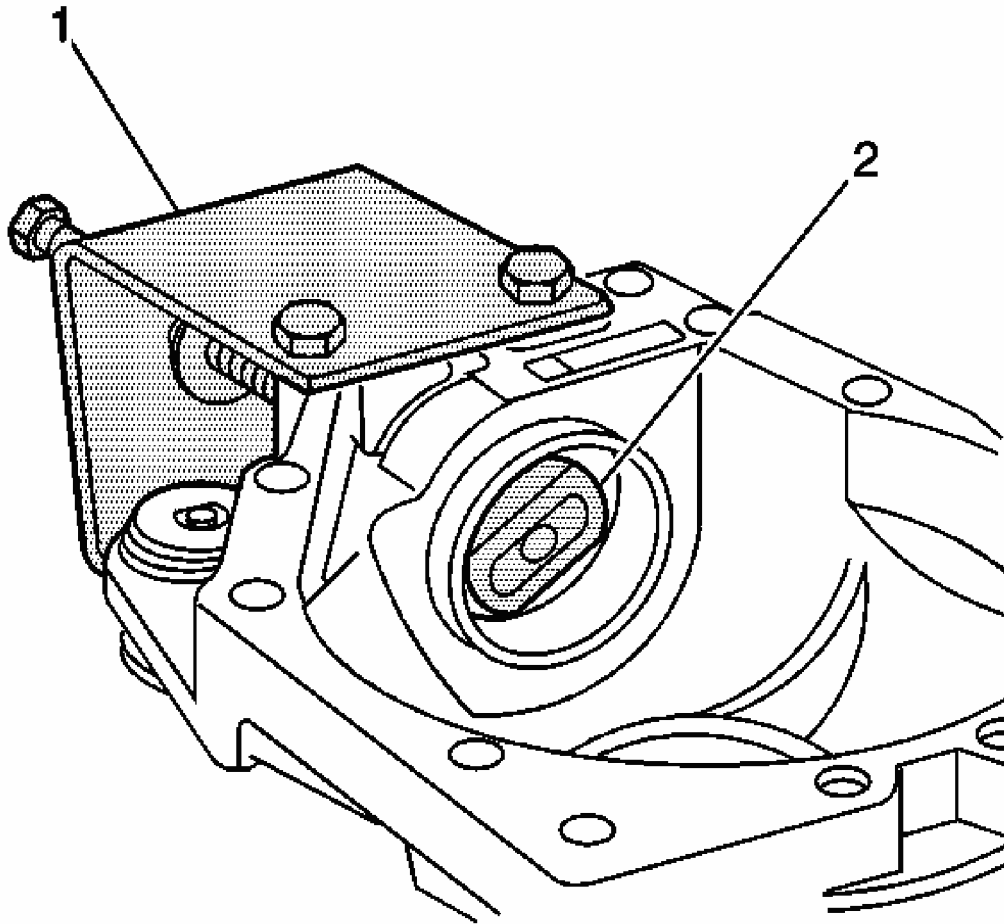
Installing J 33837-6 Onto J 33837-3 Between Inner & Outer Bearing Cup
